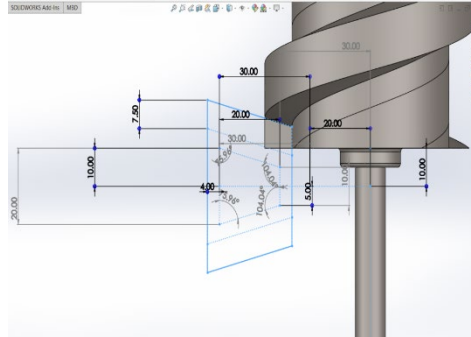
Dimensions of Cross-section of Helical cut on the Mixing shaft.
